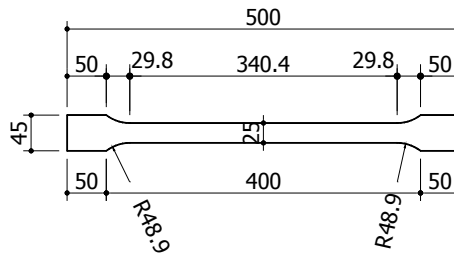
Detail of Tension Coupons for Beam End Plate (dimensions in mm)
